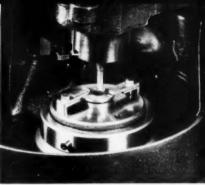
Close view of Fellows 7-type gear shaper generating hexagon nut and bolt
